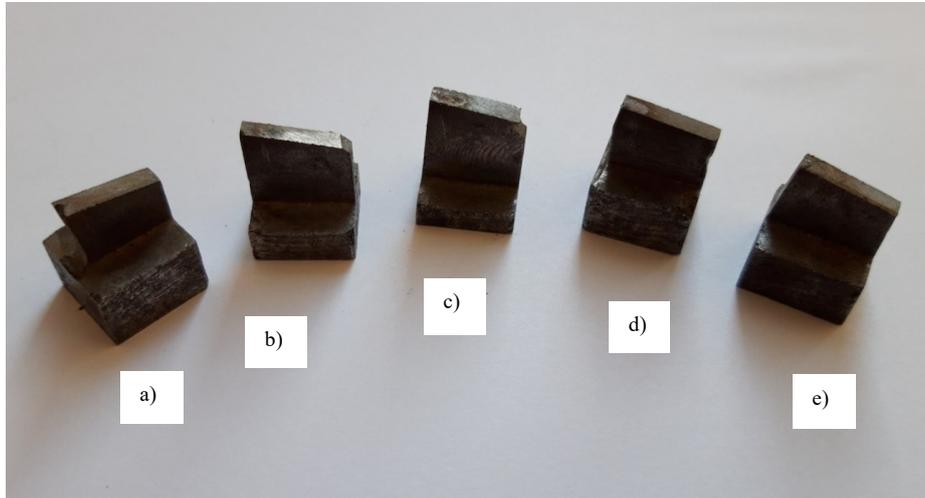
Micro-cutters from the value of the front cutting angle γ : a) $+5^\circ$; b) 0° ; c) -5° ; d) -10° ; e) -15°
